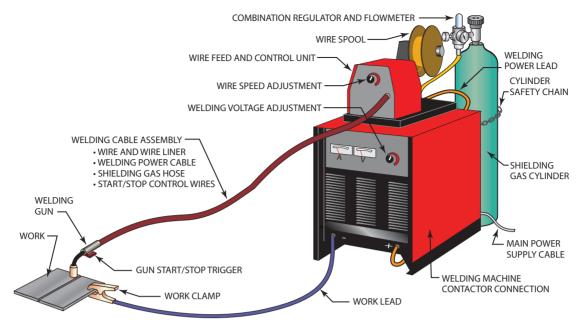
Gas metal arc welding equipment.
